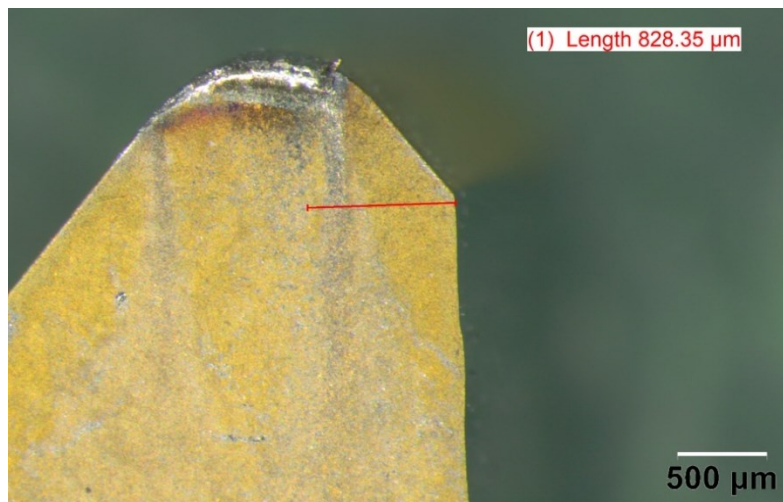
Example of result after cutting tool and measure in optical microscope.
